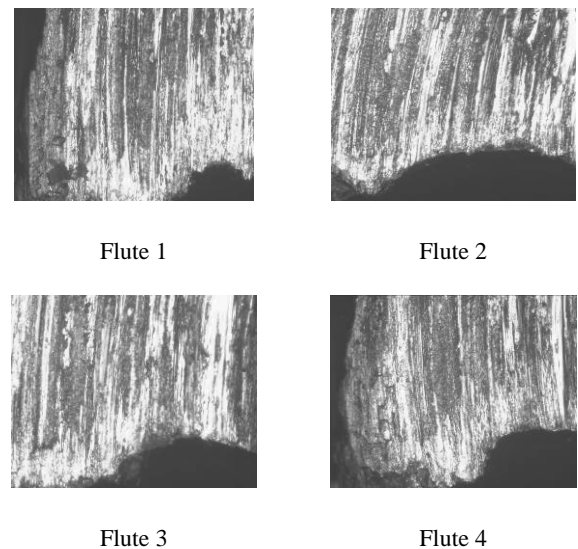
Flank wear at cutting speed of 30 m/min.with MQL
